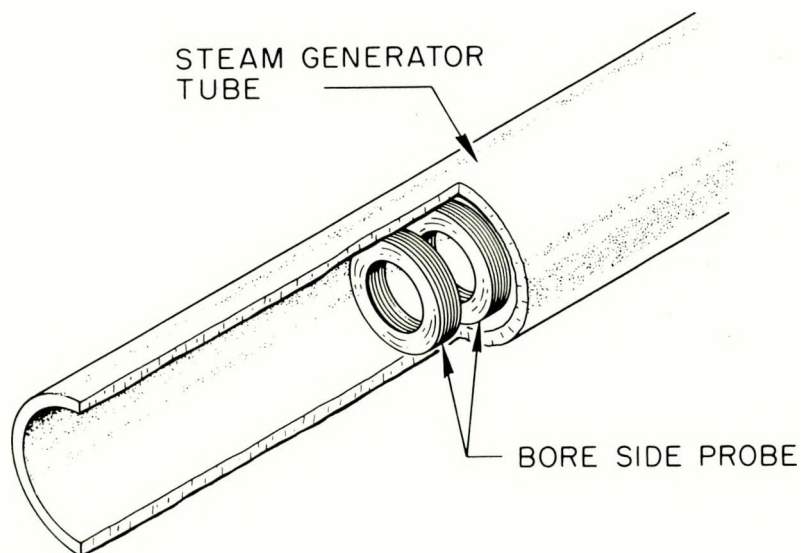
Eddy-Current Inspection of the Bore of Steam Generator Tubing.
